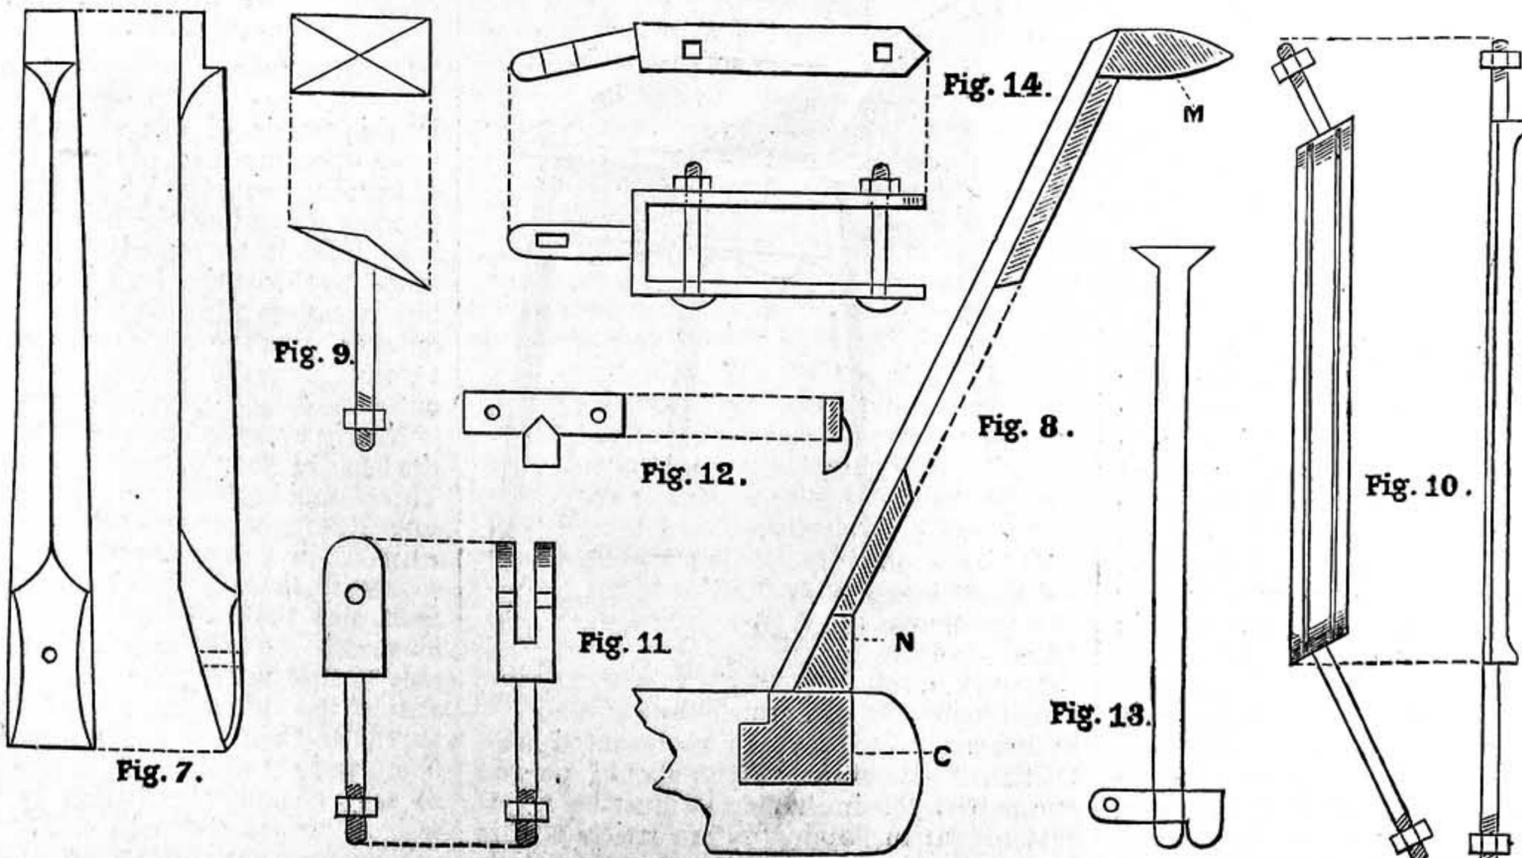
Standards: Wood. Fig. 8.—Section of Front, showing Manner of fixing Boarding. Fig. 9.—Standard Bolts. Fig. 10.—Front Corner Standards: Iron. Fig. 11.—Jaws for holding Tipping Bar. Fig. 12.—Nib-Irons for Tailboard. Fig. 13.—Axle-Pins. Fig. 14.—Rave-Irons to hold Tailboard.
